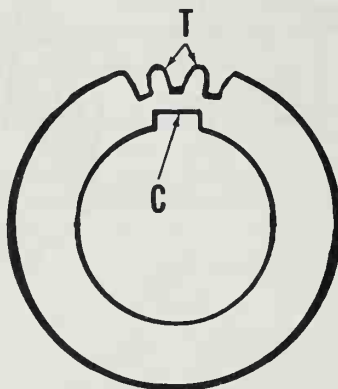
When viewed from end of crankshaft, crankshaft gear keyway (C) should be centered between two gear teeth (T).
